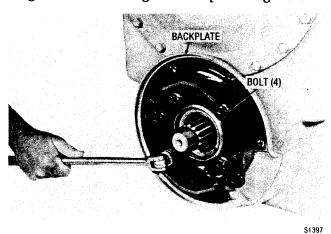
Removing parking brake backplate bolts (-1 models)
